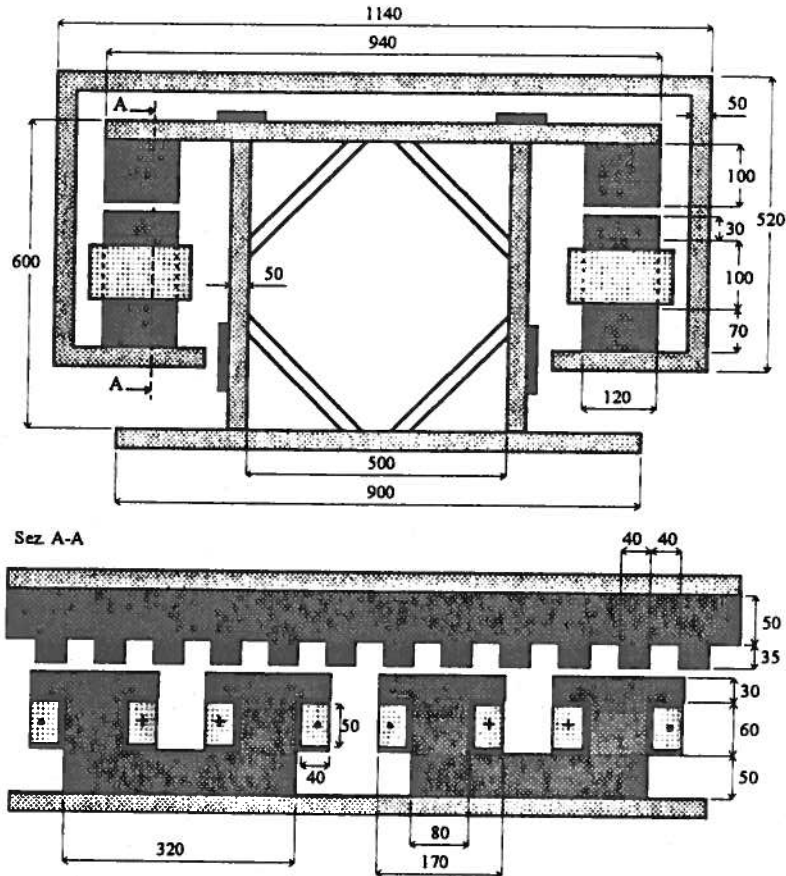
Longitudinal view and lateral section view (A-A) of the constructed levitating platform.
